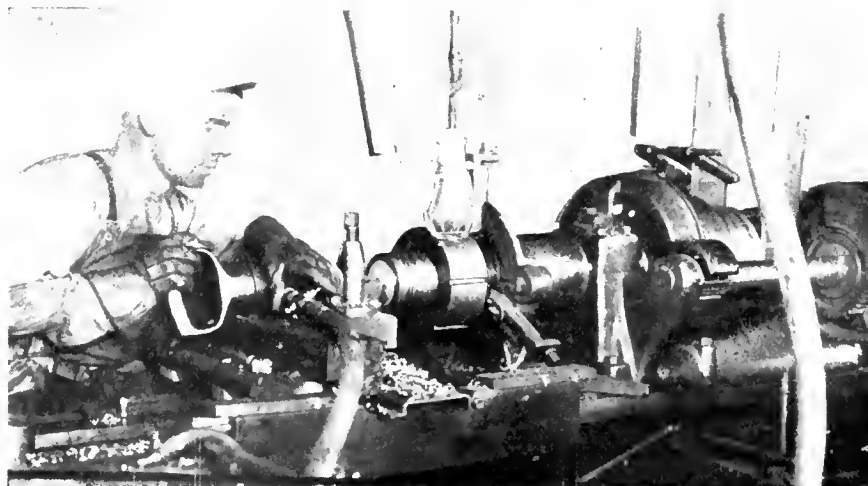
RIVETING-IN SHELL BASE PLATES.
